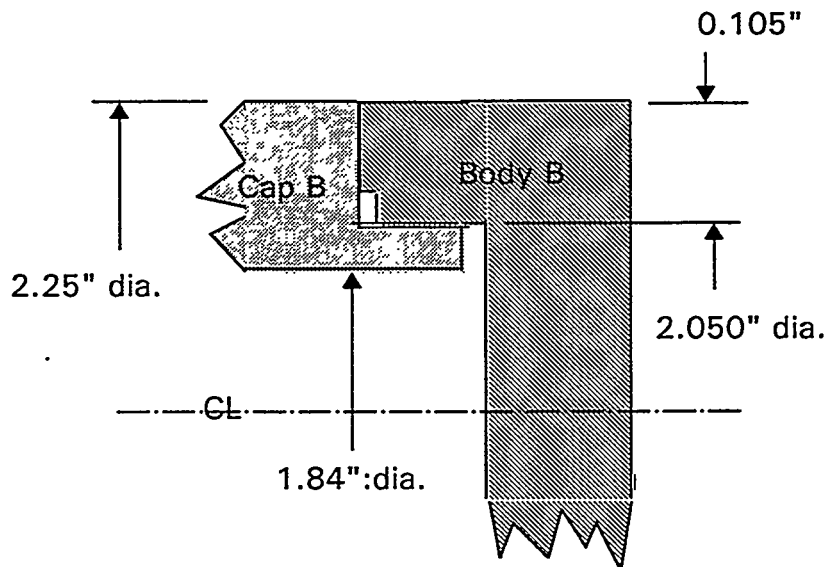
"Cap B" to "Body B" weld configuration.
